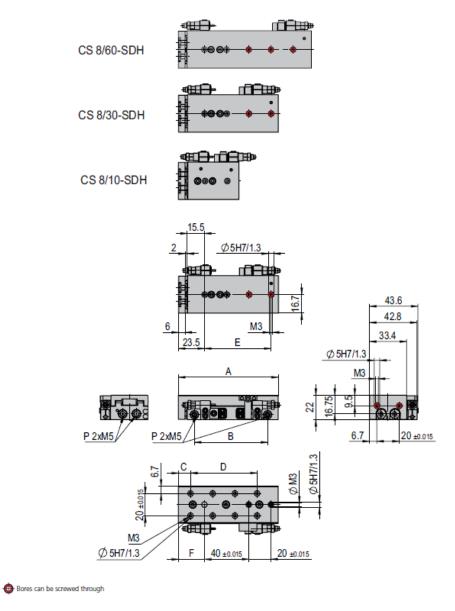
Dimensional drawing Compact Slide CS 8 SDH
